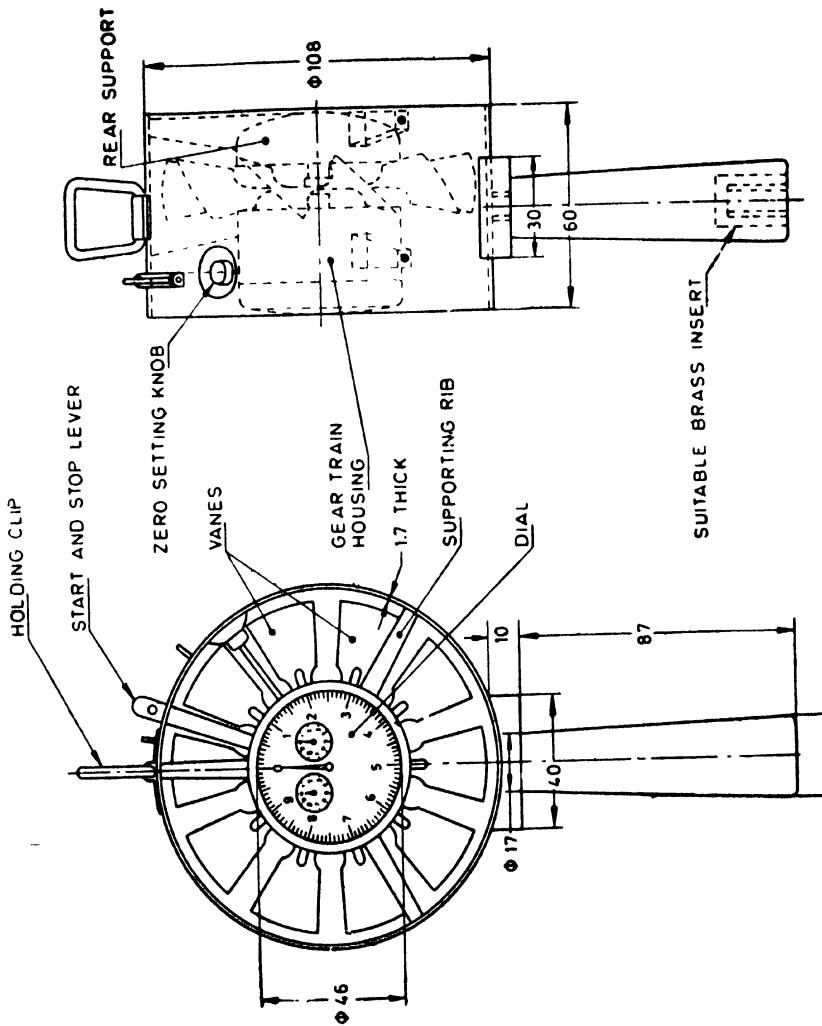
GENERAL ARRANGEMENT AND DIMENSIONS OF AIRMETER
